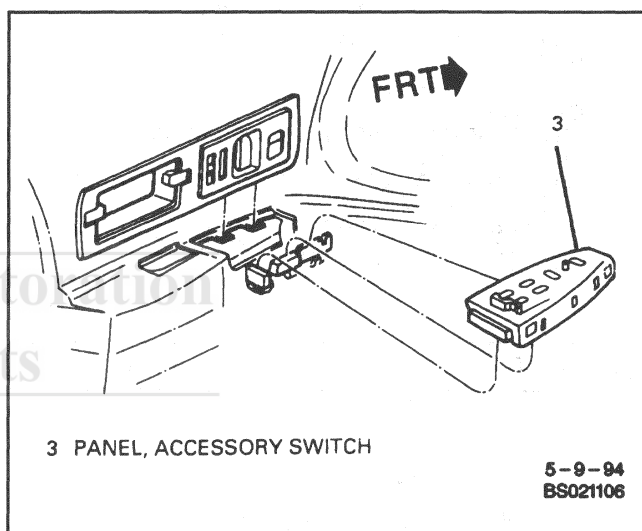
Removing Accessory Switch Panel-(Chevrolet)
